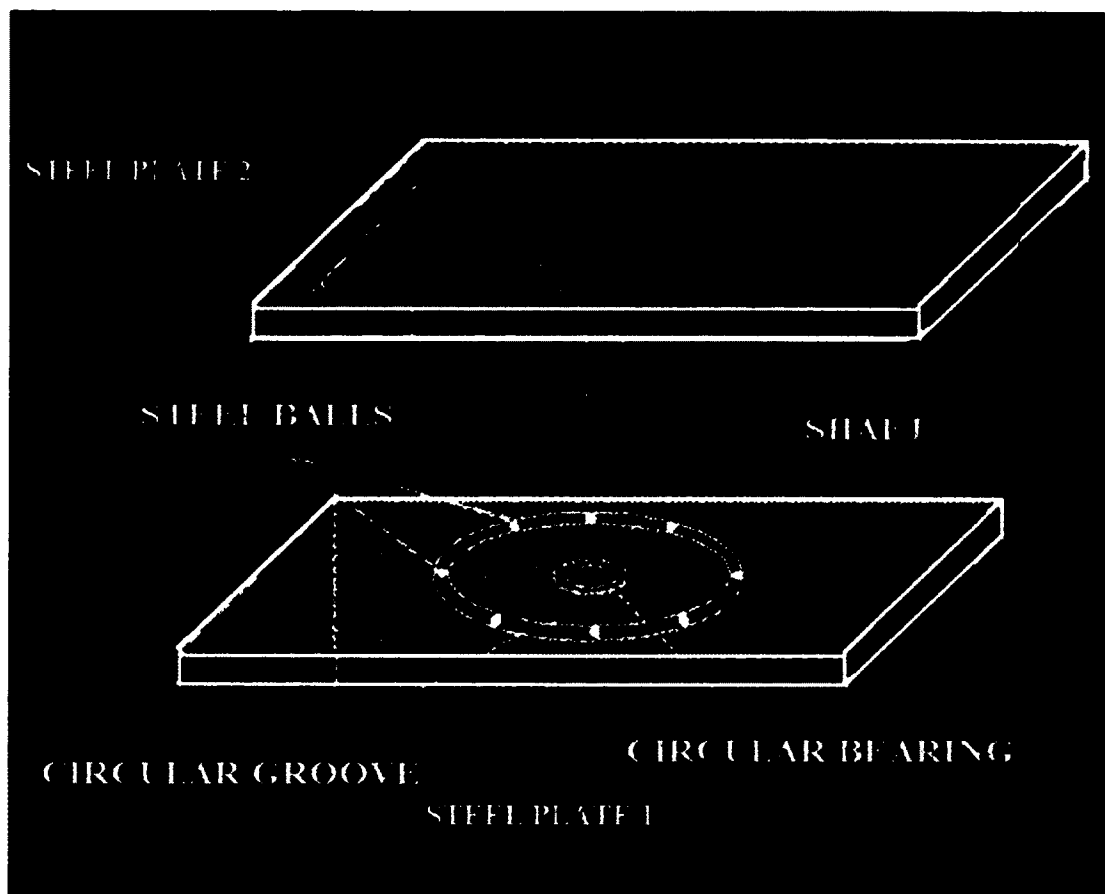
Steel Plates 1 and 2 for torque assembly below lower end gimbal
